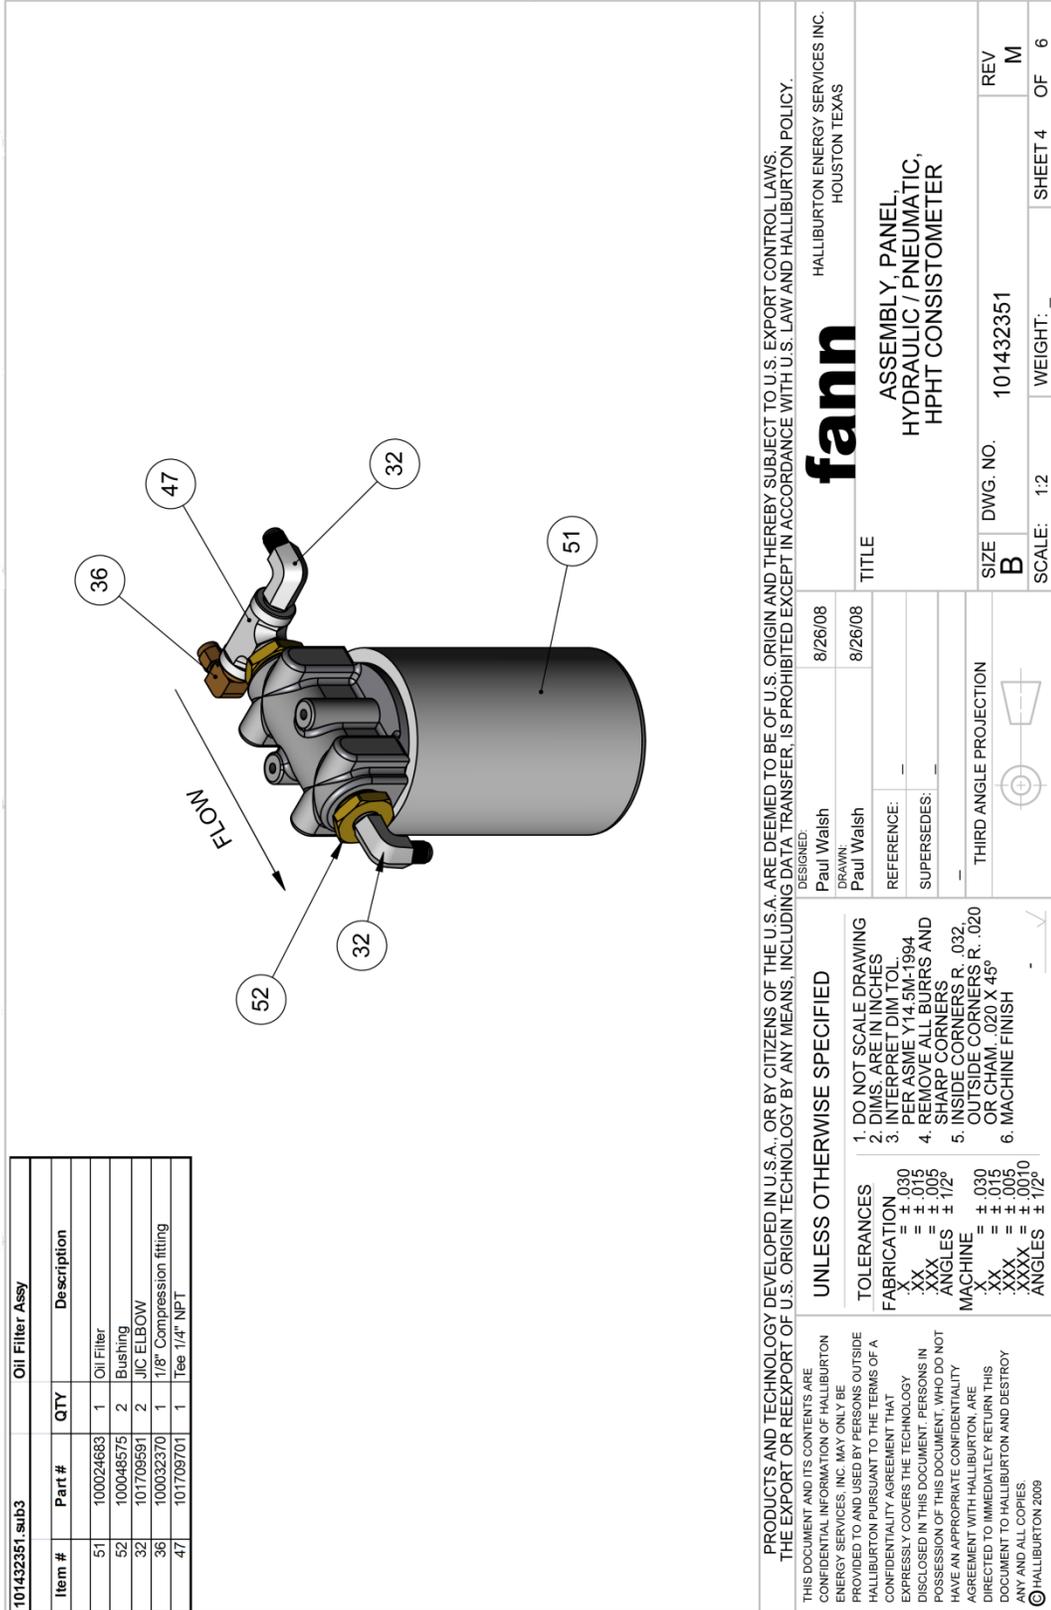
Hydraulic/Pneumatic Panel Assembly, 4/6
